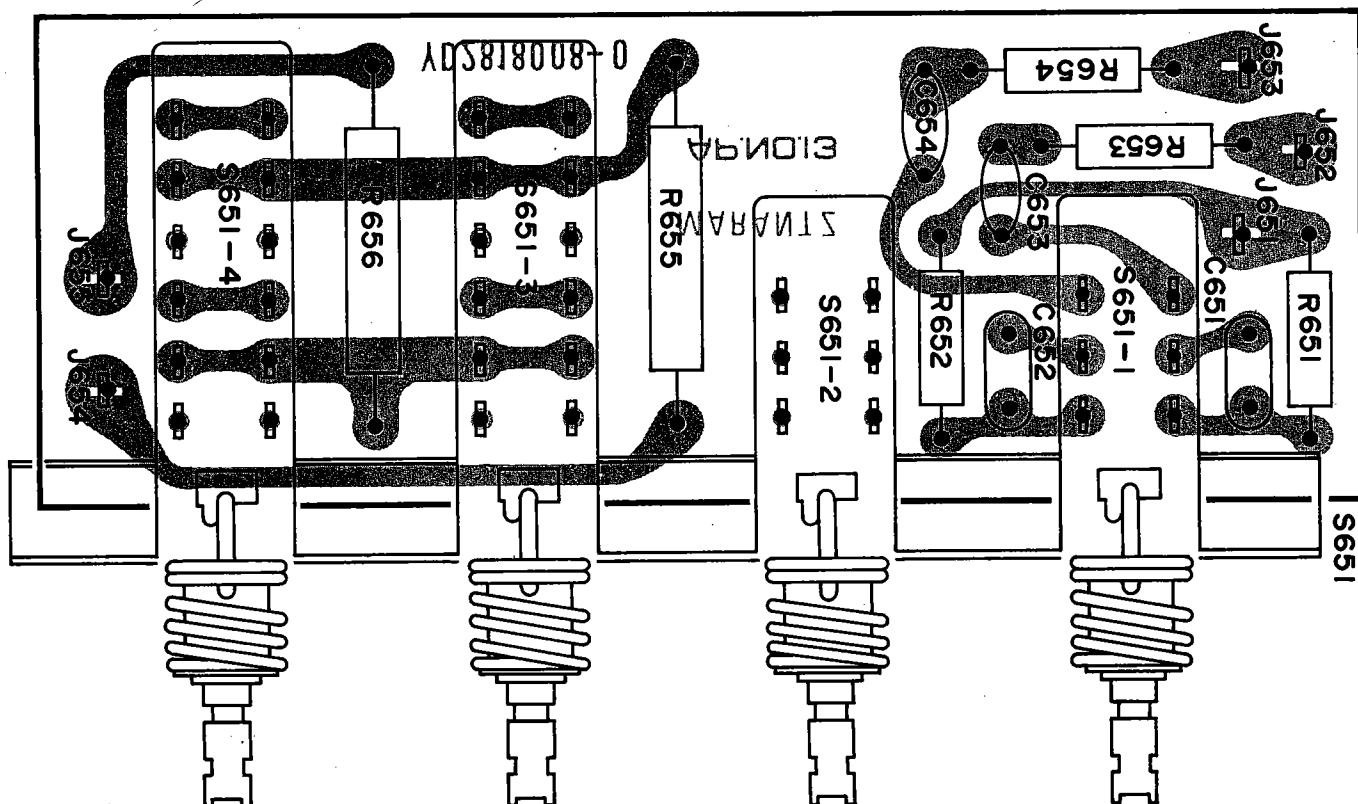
Loudness, Muting and Speakers Switch Assembly P650 Component Locations
